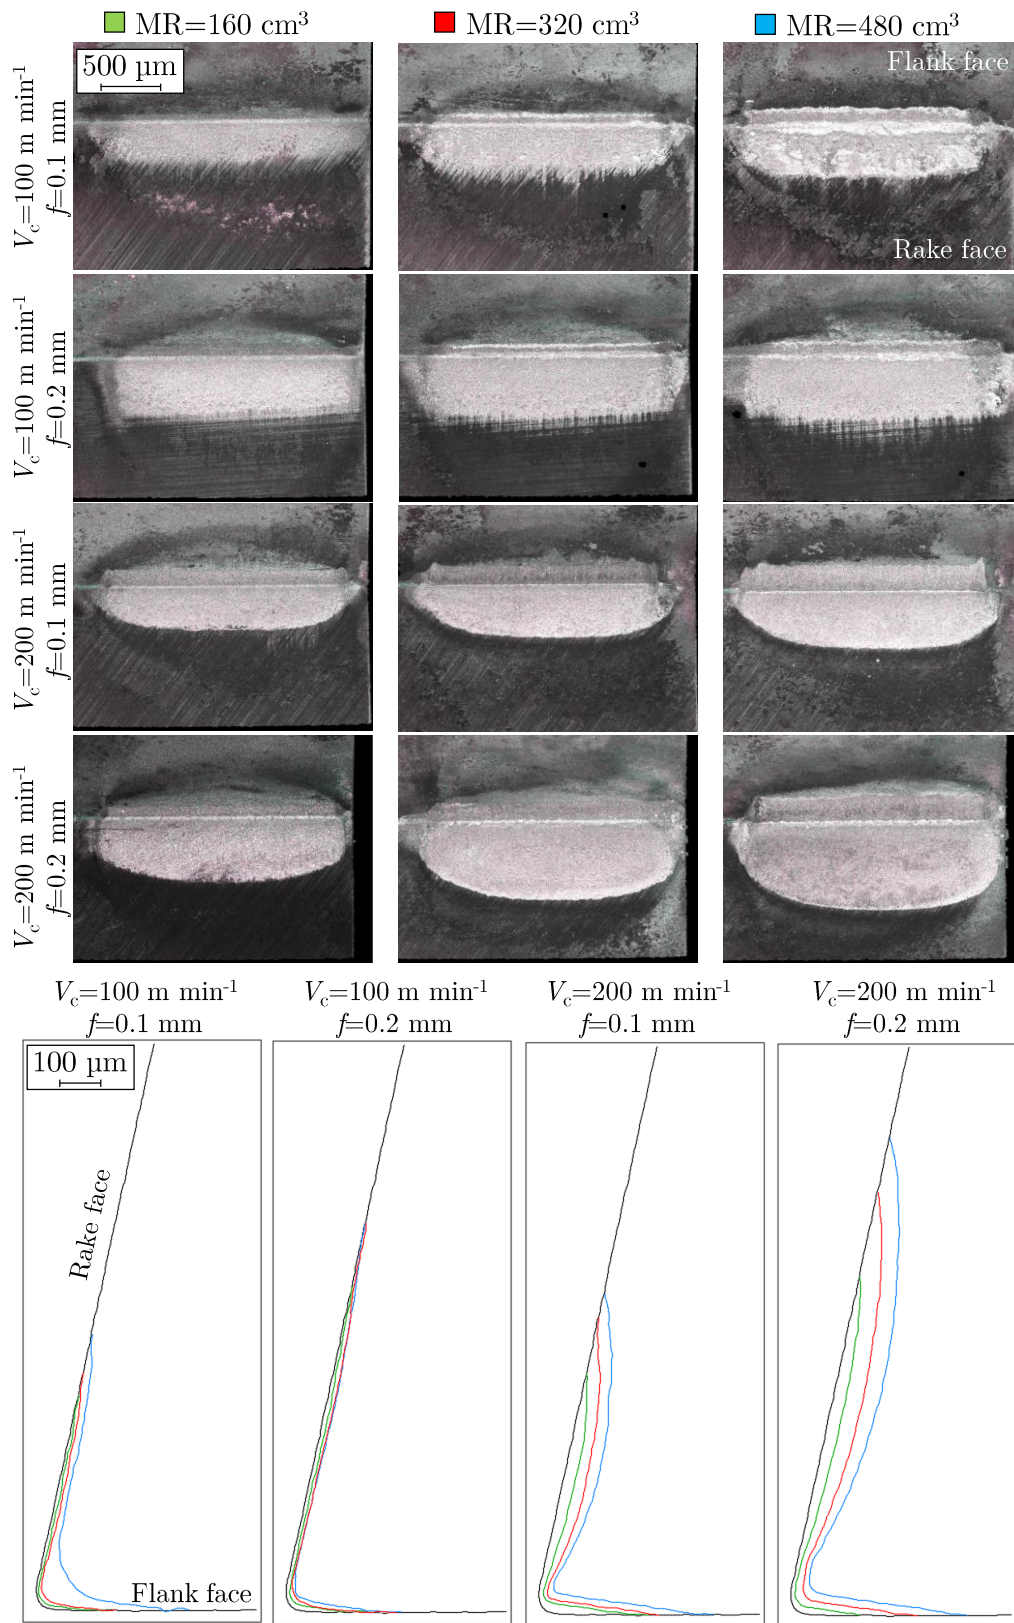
2D geometry of worn flank and rake faces of the tool, and worn profile of the mid plane contact section. Captures extracted at the MR of 160, 320 and 480 cm<sup>3</sup> for 16MnCr5 steel
